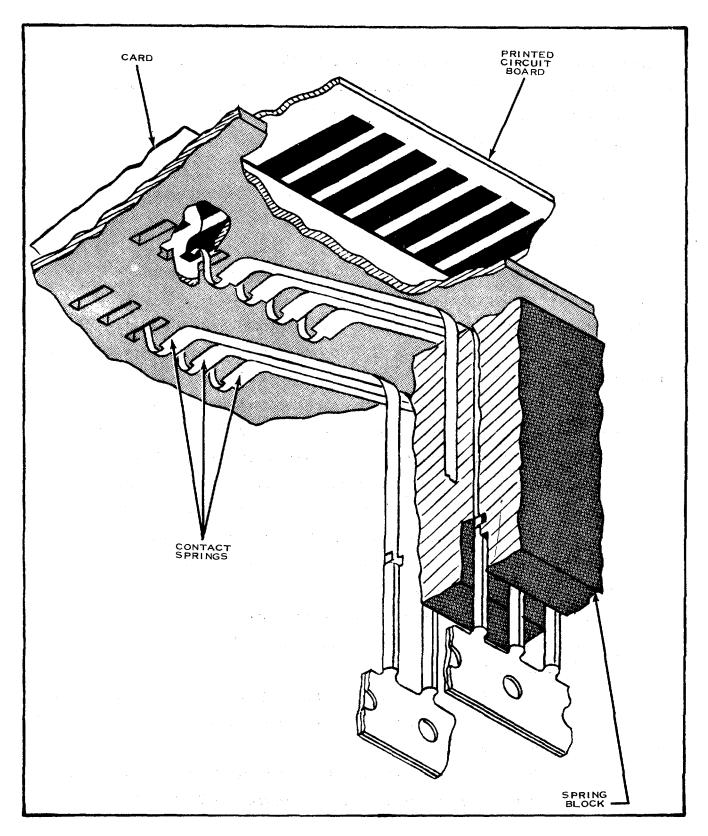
Typical Contact Spring, IBM Card and PC Board Arrangement
